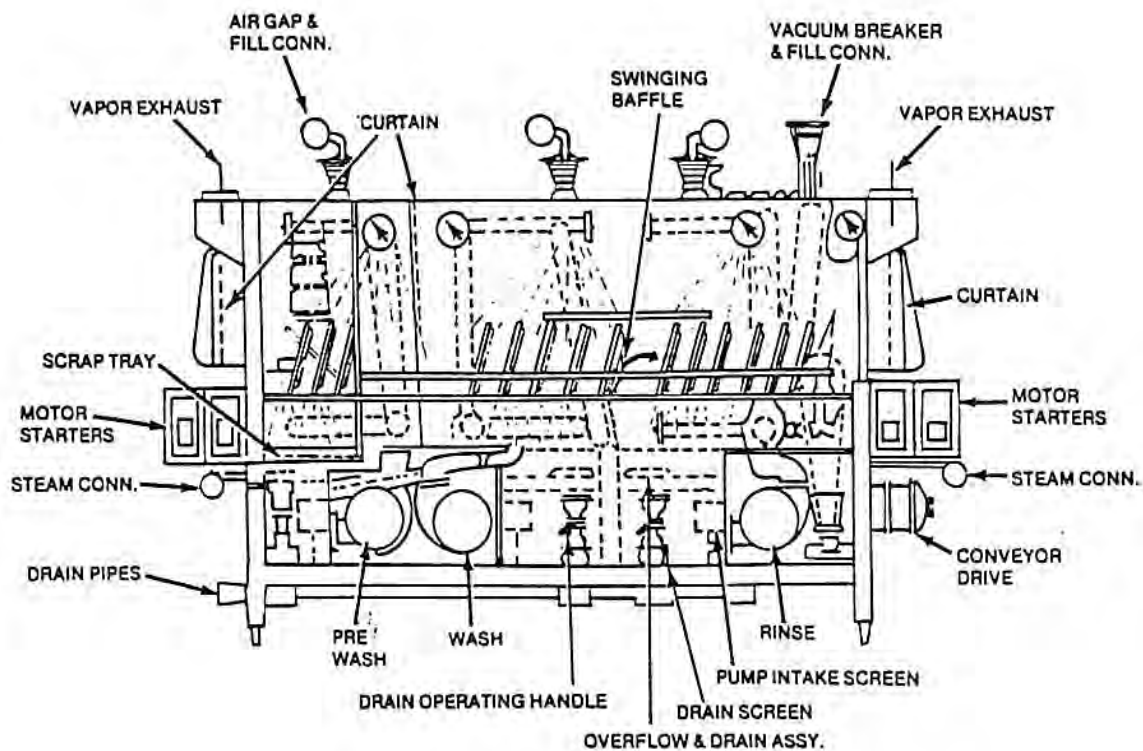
Multiple-tank rack conveyor type dishwasher machine
